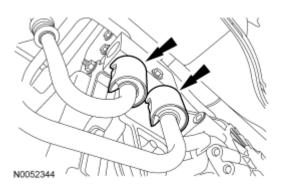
Locating Upper Evaporative Emissions (EVAP) Tube Quick Connect Coupling Courtesy of FORD MOTOR CO.
